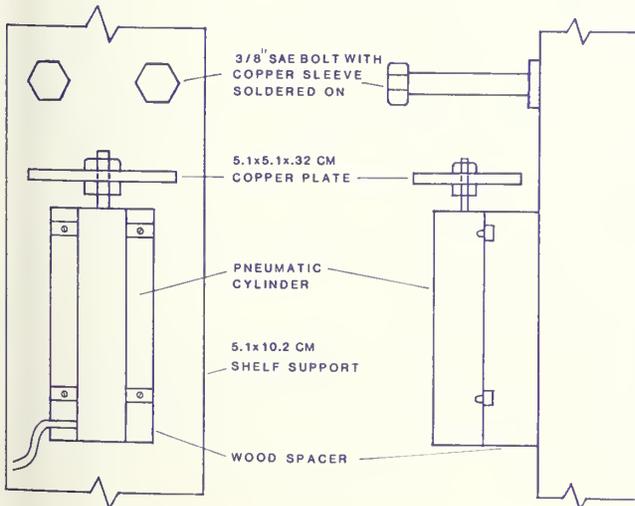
Detail drawing of the high-voltage power supply switch (ref. fig. 6).
